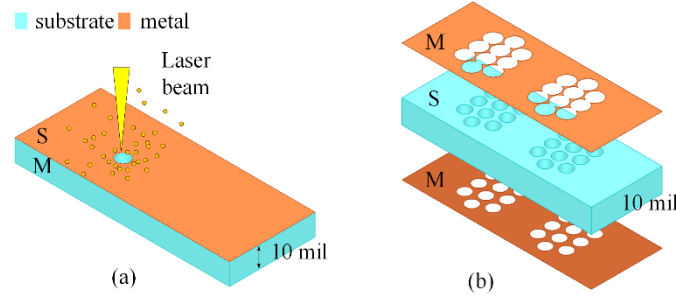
(a) Manufacturing process and (b) 3D view of 10-mil single-layer SINRD waveguide
